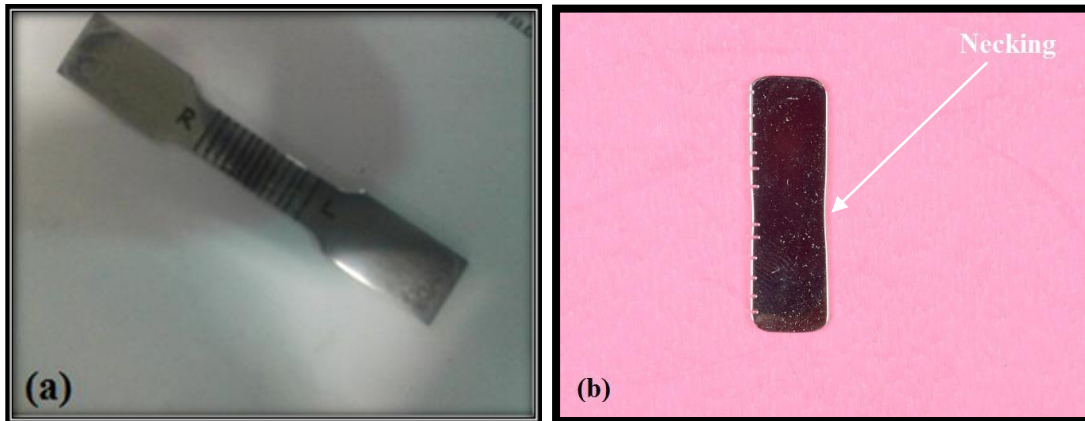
Tensile Testing Specimen (a) before tensile test (b) after tensile test showing gauge length specimen and cutting grip section
